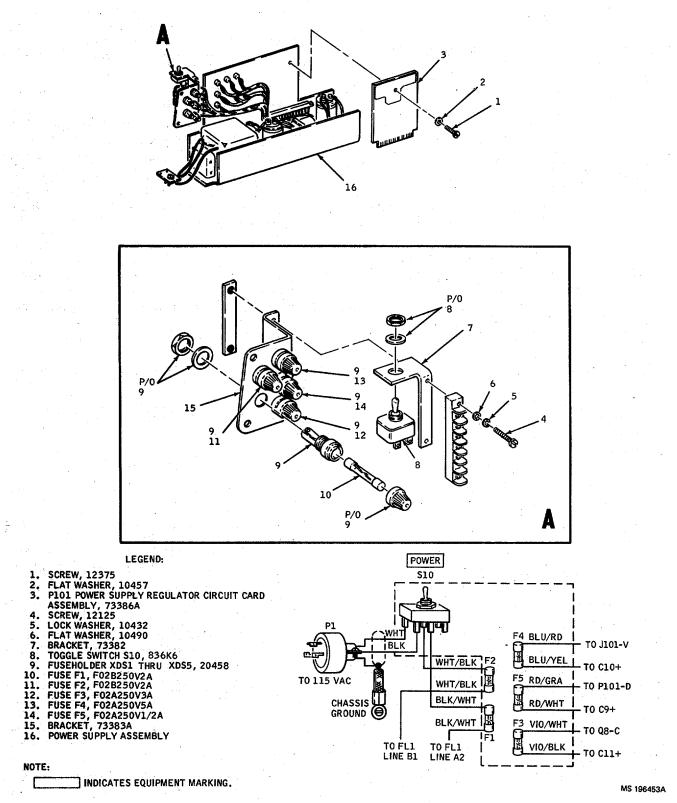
Poser Supply Assembly, Exploded View Change 1 6-160
